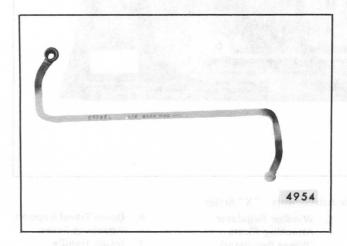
Front Door Hinge Tool J-24353 or Equivalent - "A, B, C, E and F" Styles
